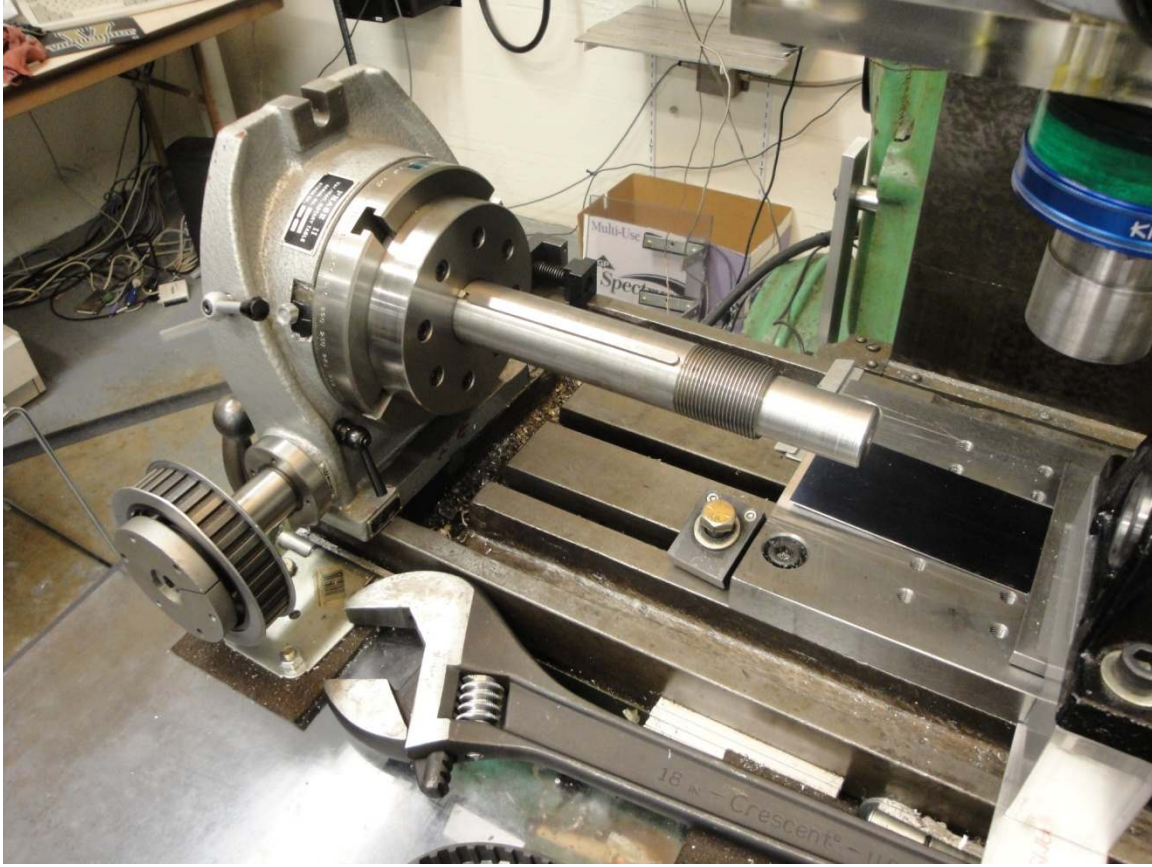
Rotary welding apparatus with keyed shaft.
